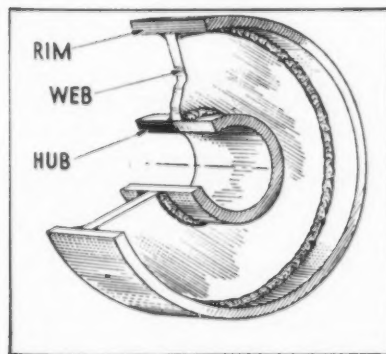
Alternate design. Hub is machined from tubing and rim is rolled from steel strip. Hub and rim are fillet welded to web.
